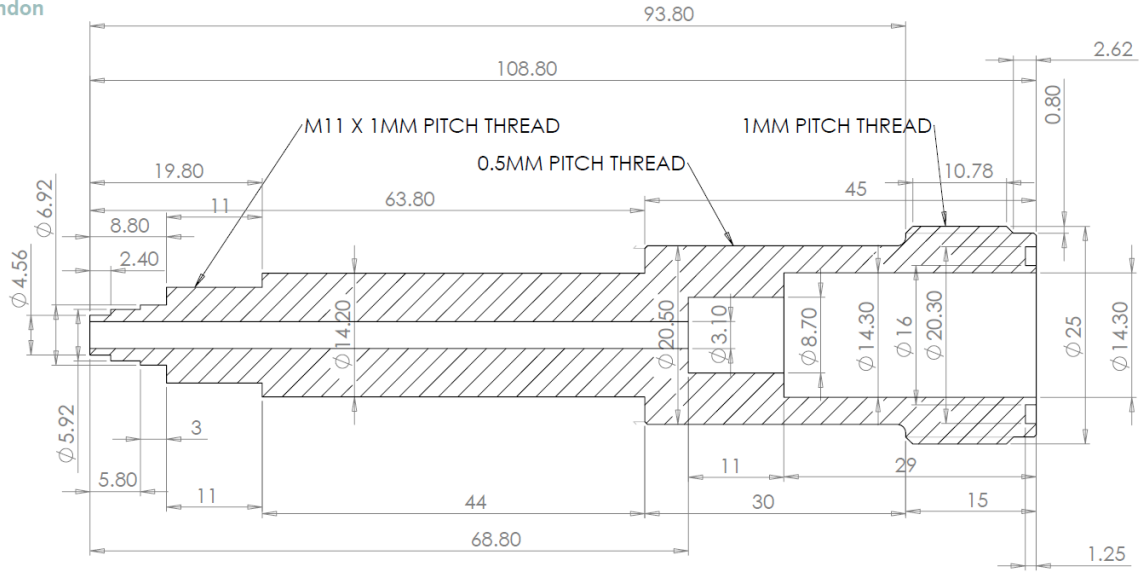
Engineering drawing of the substrate adjuster assembly
